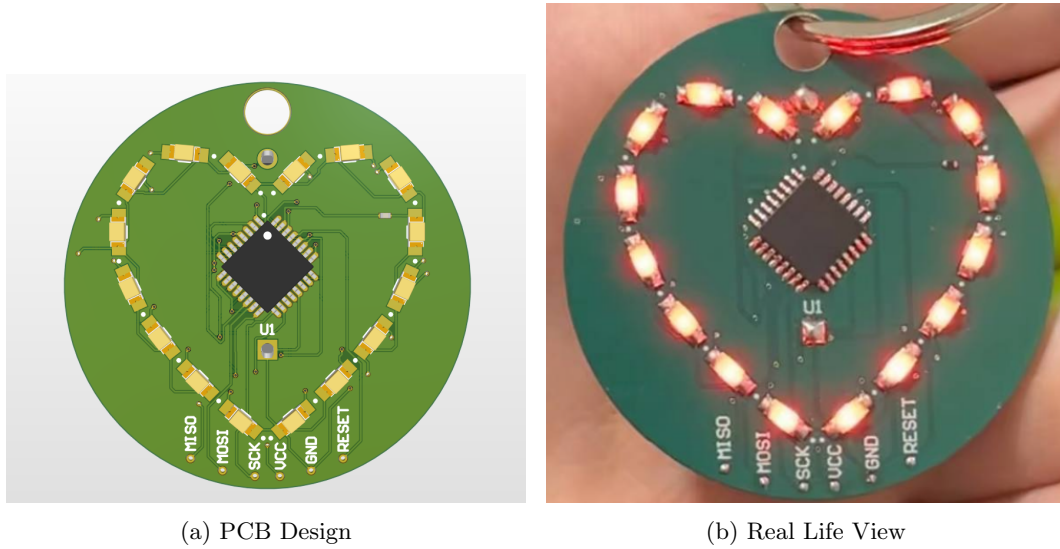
PCB Design and Real Life View of the heart-shaped PCB.
